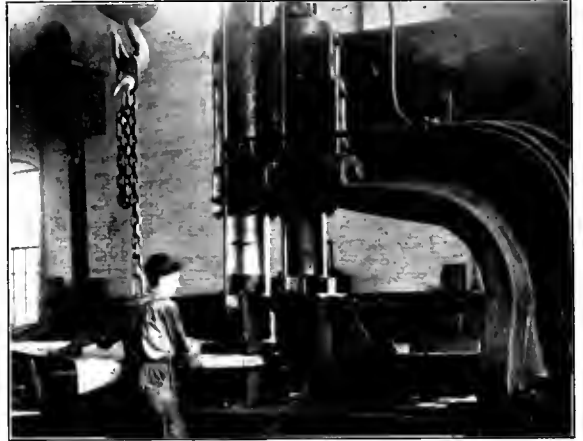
Flanging a $\frac{1}{2}$ -In. Tube Sheet Cold
